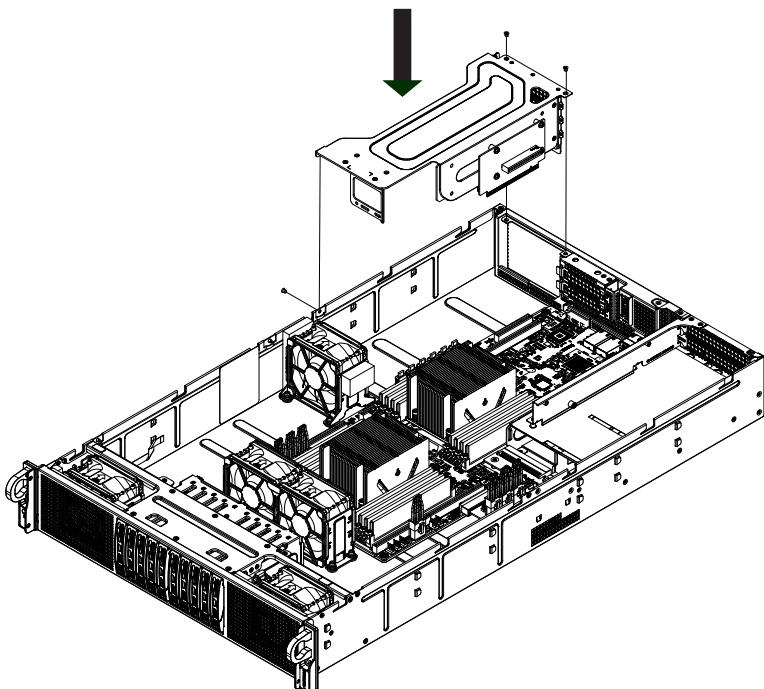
Installing the Expansion Card Bracket into the Chassis
